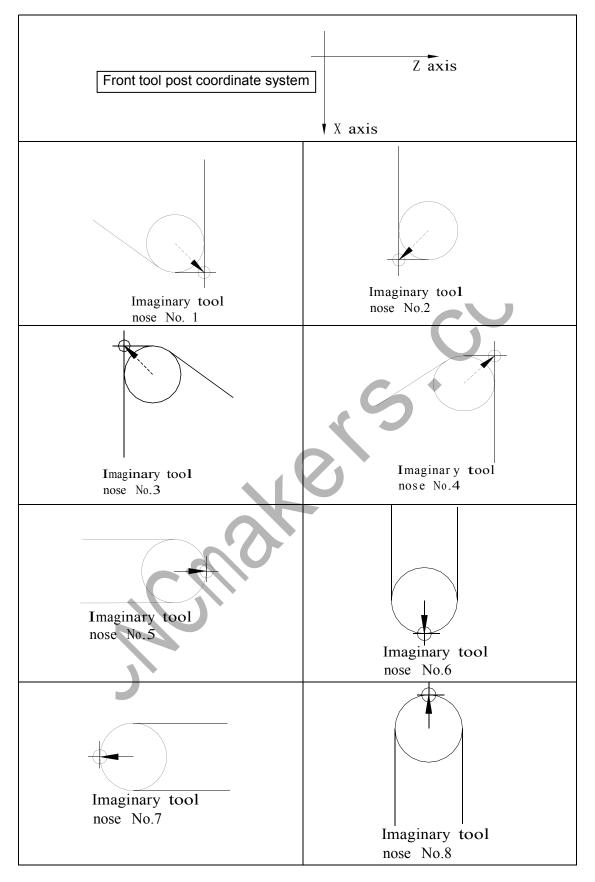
Imaginary tool nose number in front tool post coordinate system
